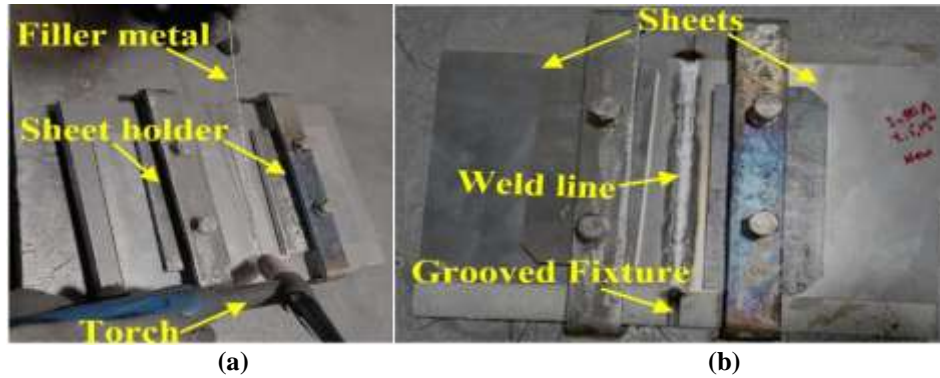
The welding set-up: (a): Fixture for welding the sheets, and (b): The final welded blank.
